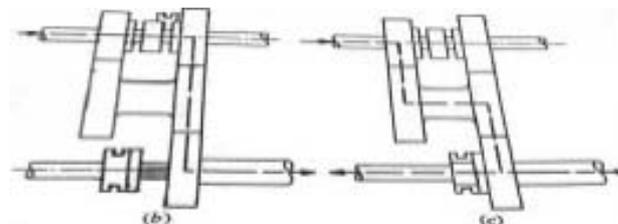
WD in High Gear Fig. (c) : 4 WD in Low Gear
